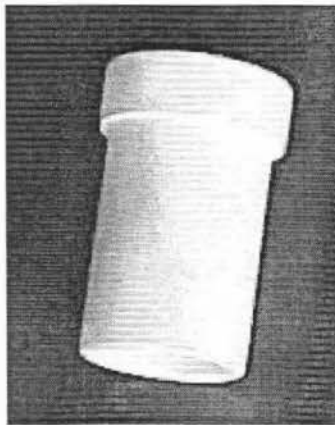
Ceramic sleeve used to stop contact between the coil and component.
